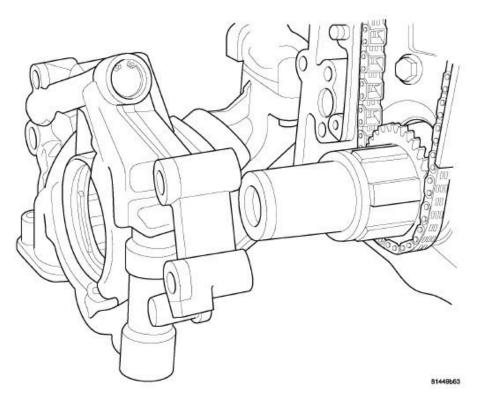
OIL PUMP REMOVAL/INSTALLATION Courtesy of CHRYSLER LLC
